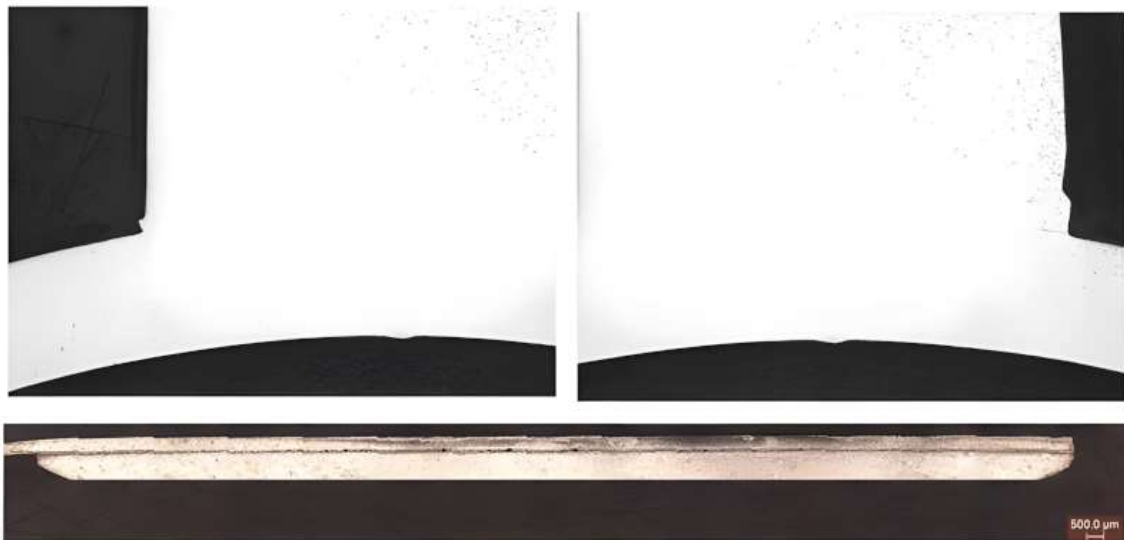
Metallographic inspection of appendages welded by brazing to the cladding at CNE fuel rods.
